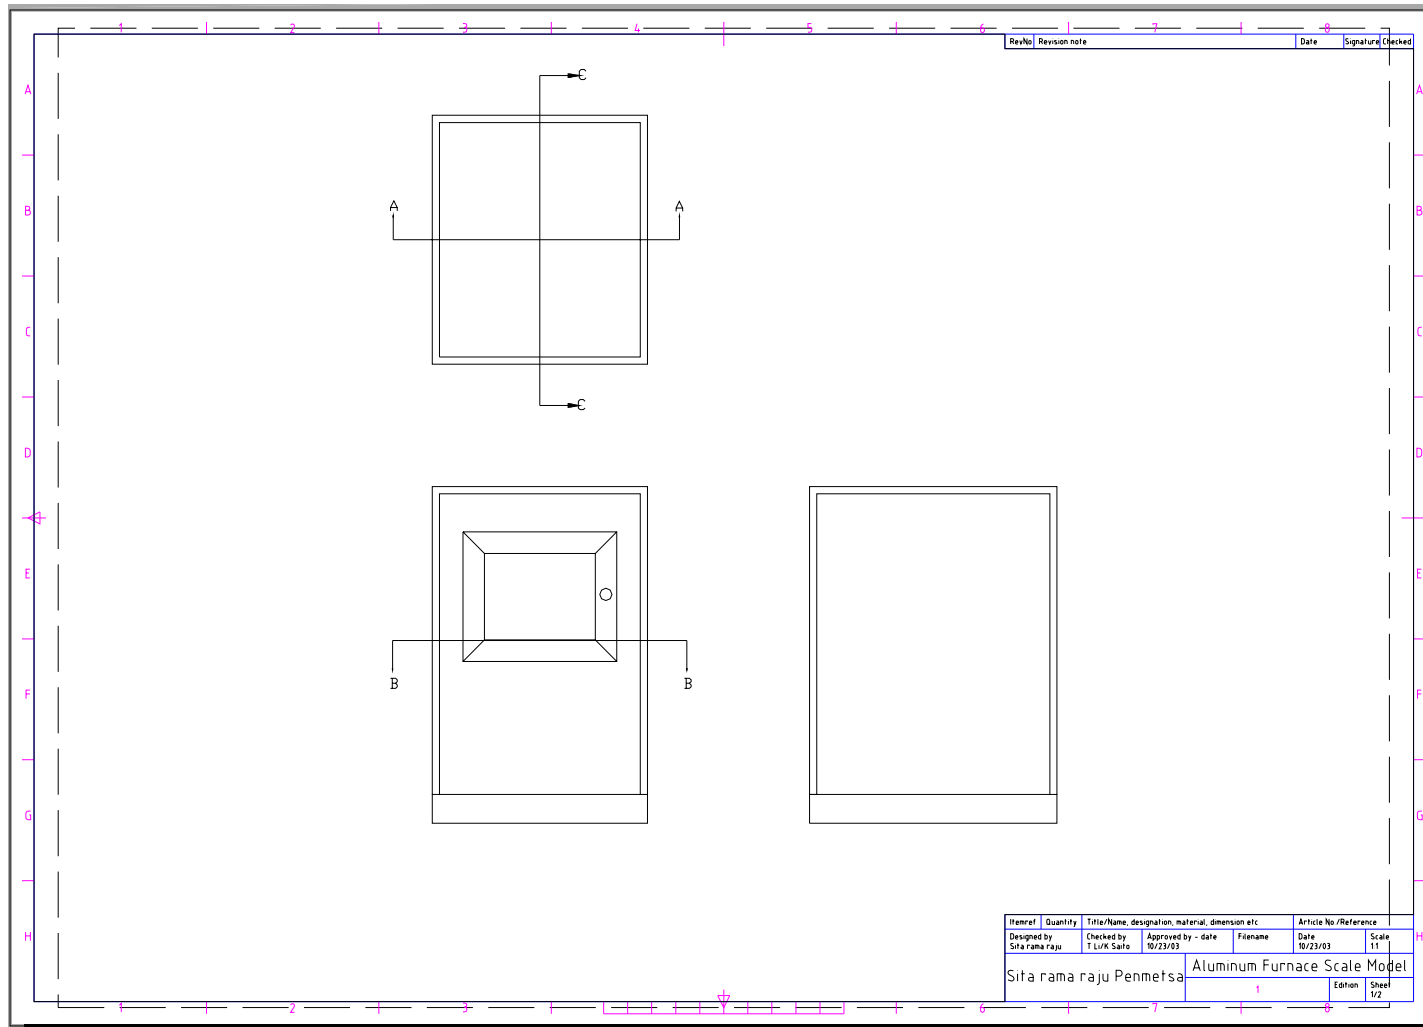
Aluminum Furnace Drawing in AutoCAD
